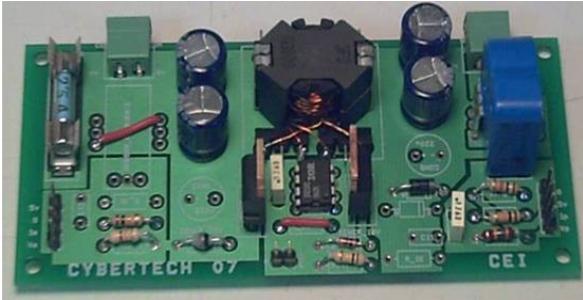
PCB of the Flyback converter used in the first edition of Solar Cybertech.
